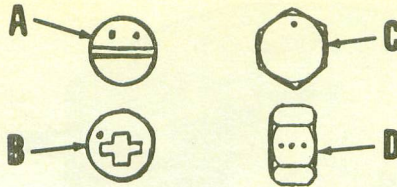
A—Marks used by one manufacturer to identify fasteners having ISO Threads. Small dots represent punch or die marks. Slotted screw and set screw marks are shown at (A), Phillips head screw at (B), bolt head at (C) and side view of nut at (D).
